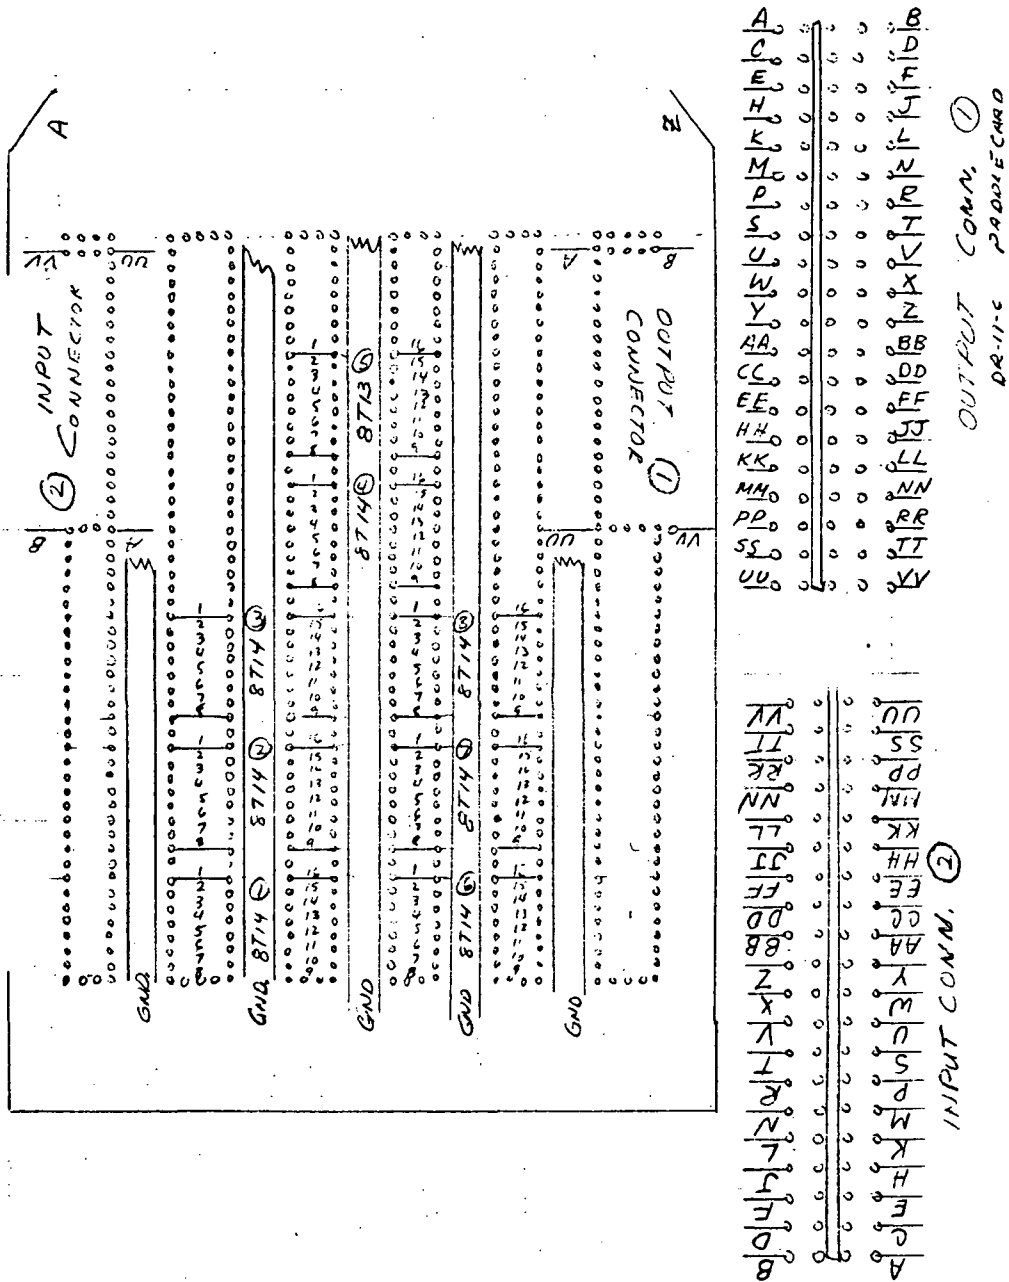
PHYSICAL LAYOUT OF PLUG CARD (4-C)
